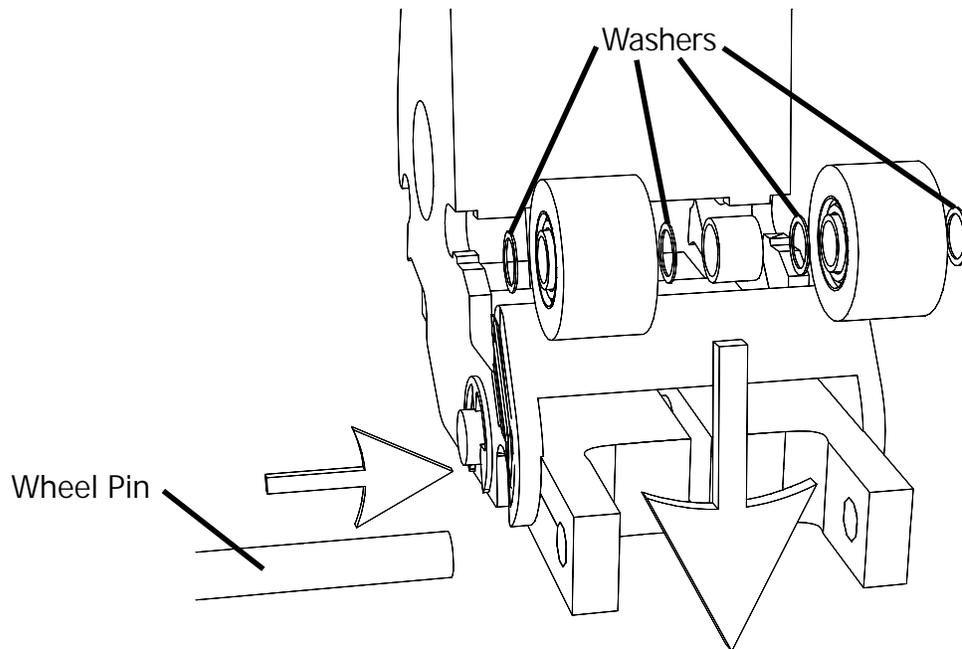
Place washers on either side of the wheel before inserting the pin
